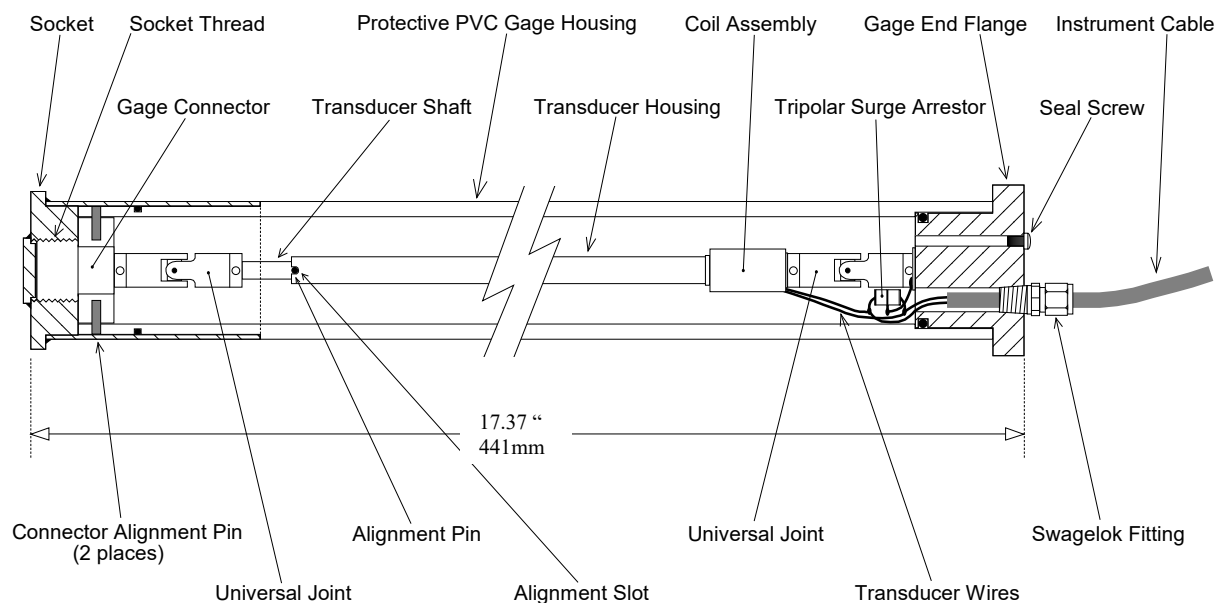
Model 4400 Vibrating Wire Embedment Jointmeter
